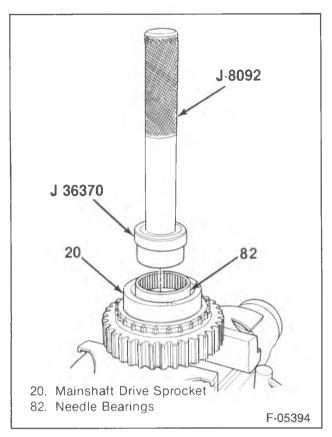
Installing the Needle Bearings to the Front Drive Sprocket
